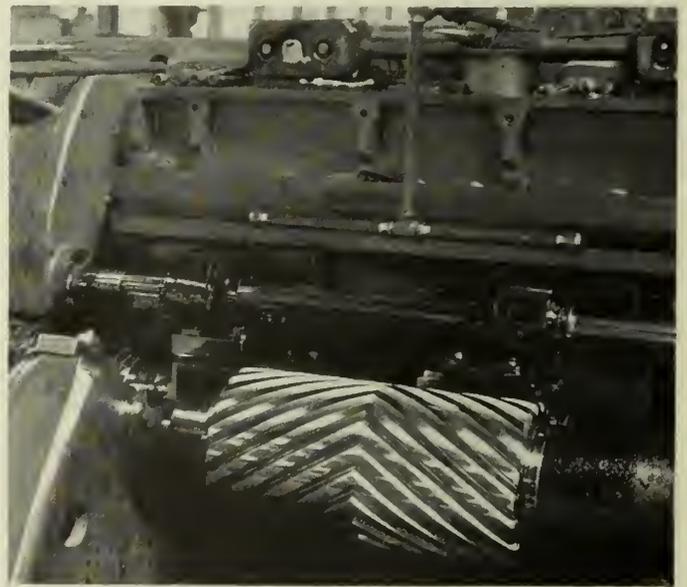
Generating Double Helical Gear 20-Tooth No. $2\frac{1}{2}$ D.P. 18-inch face in Sykes machine.
